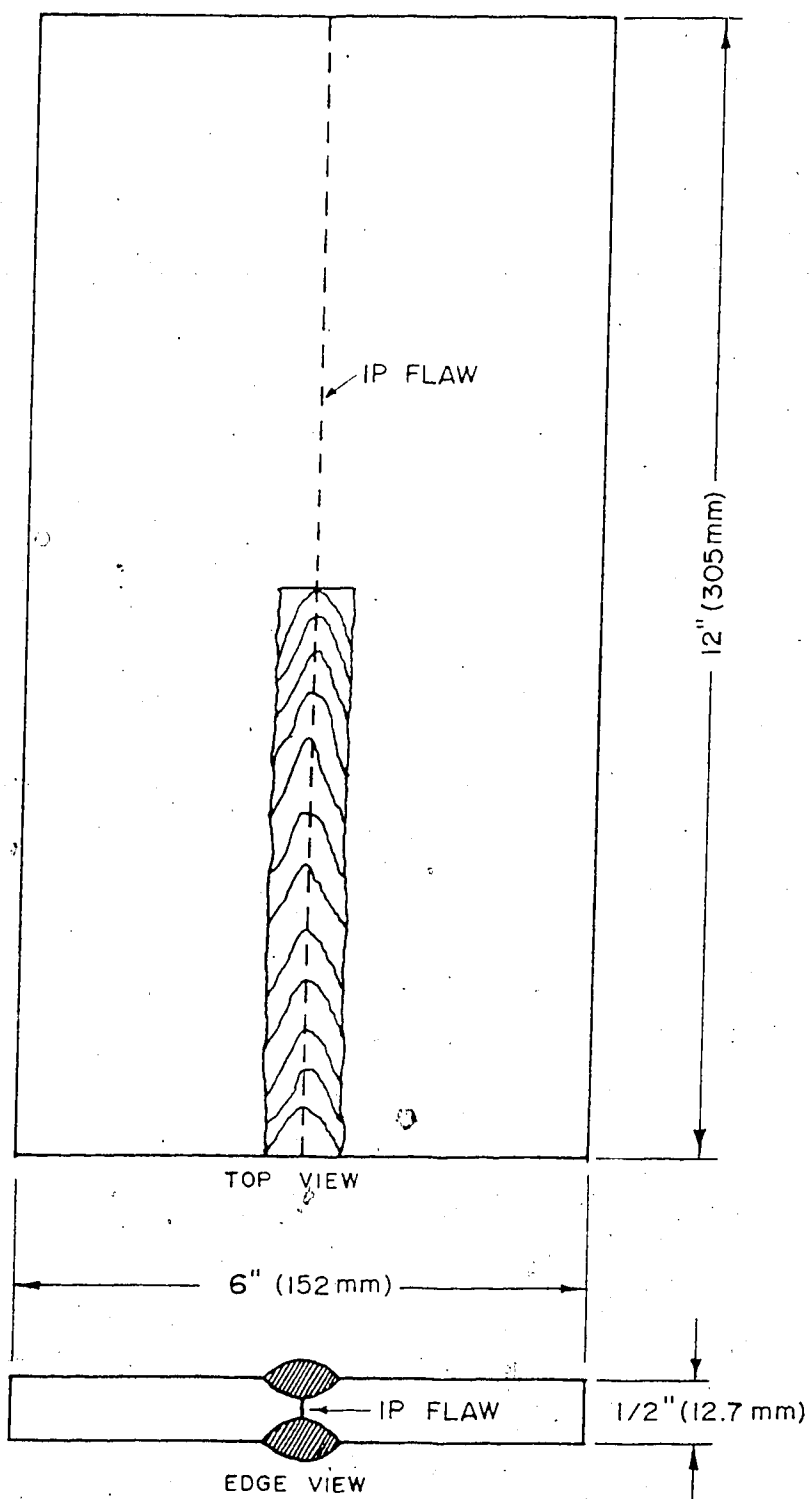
Specimen 1 - Artificially produced incomplete penetration flaw.
